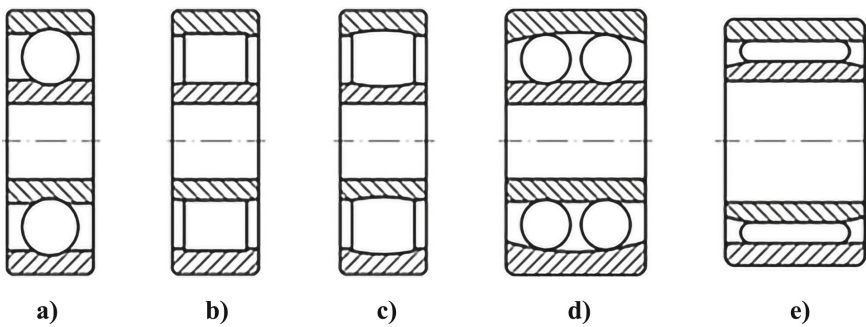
Rolling bearings: a ball bearing, b roller bearing, c barrel bearing, d self-adjusting double row ball bearing and e needle bearing [11].
